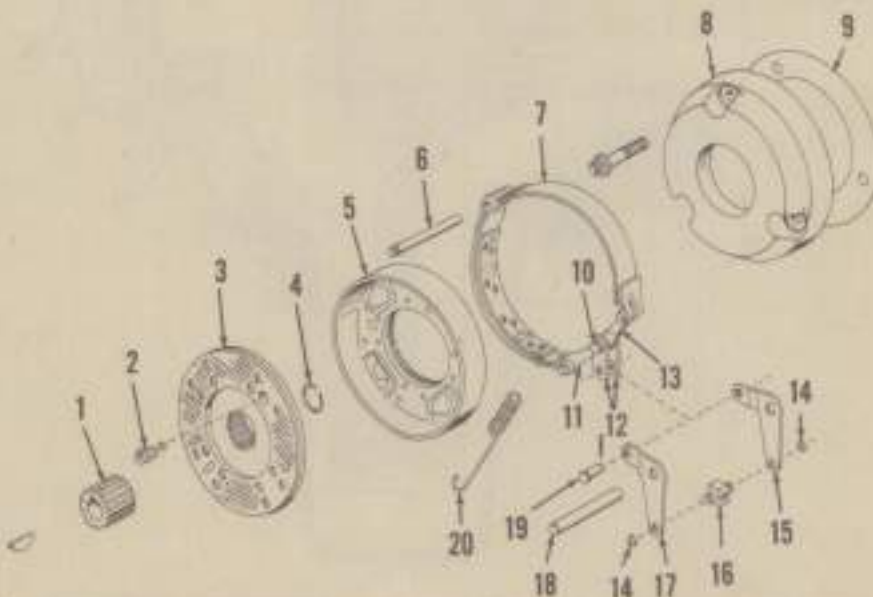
Exploded view of band/disc type brakes used on tractor Serial No. D17-42001 and up. Outer friction plate (8) is attached to inner end of bull pinion shaft housing. Differential bearing carriers are machined for brake inner friction surface. See Fig. 129 for cross-sectional view.
